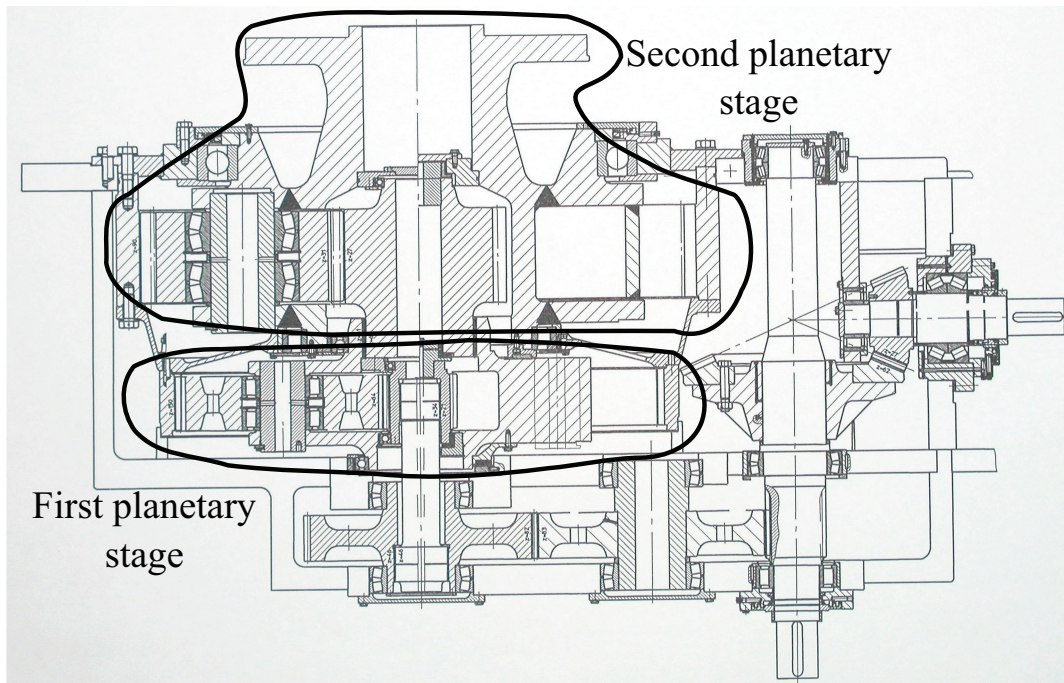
Drive gearbox of a bucket wheel excavator including two planetary stages in series.
